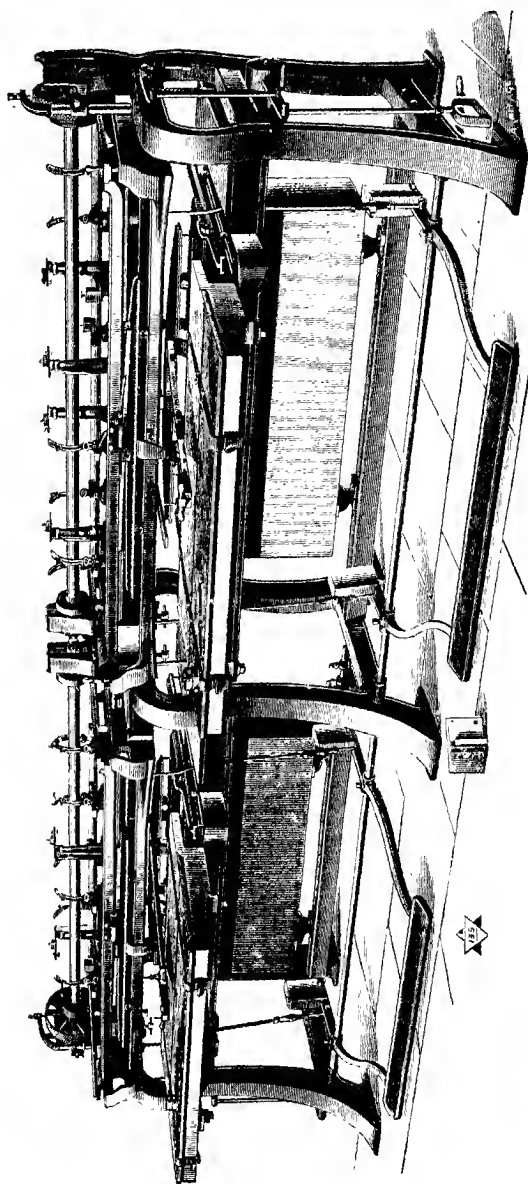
Improved Duplex Flat Table Pentagraph Engraving Machine
